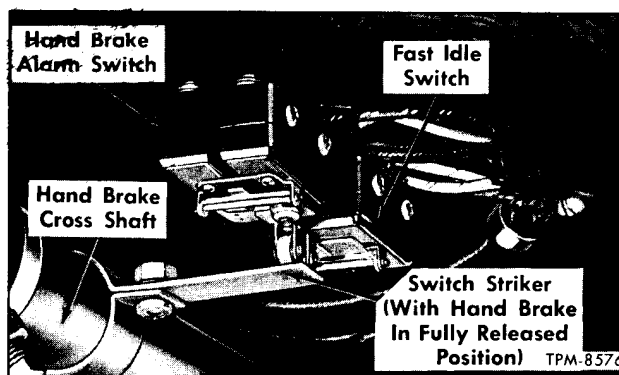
Hand Brake Alarm and Fast Idle Switches Installed
